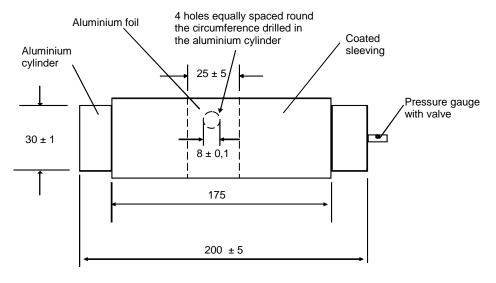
Assembly preparation for aluminium rod dynamic shear
